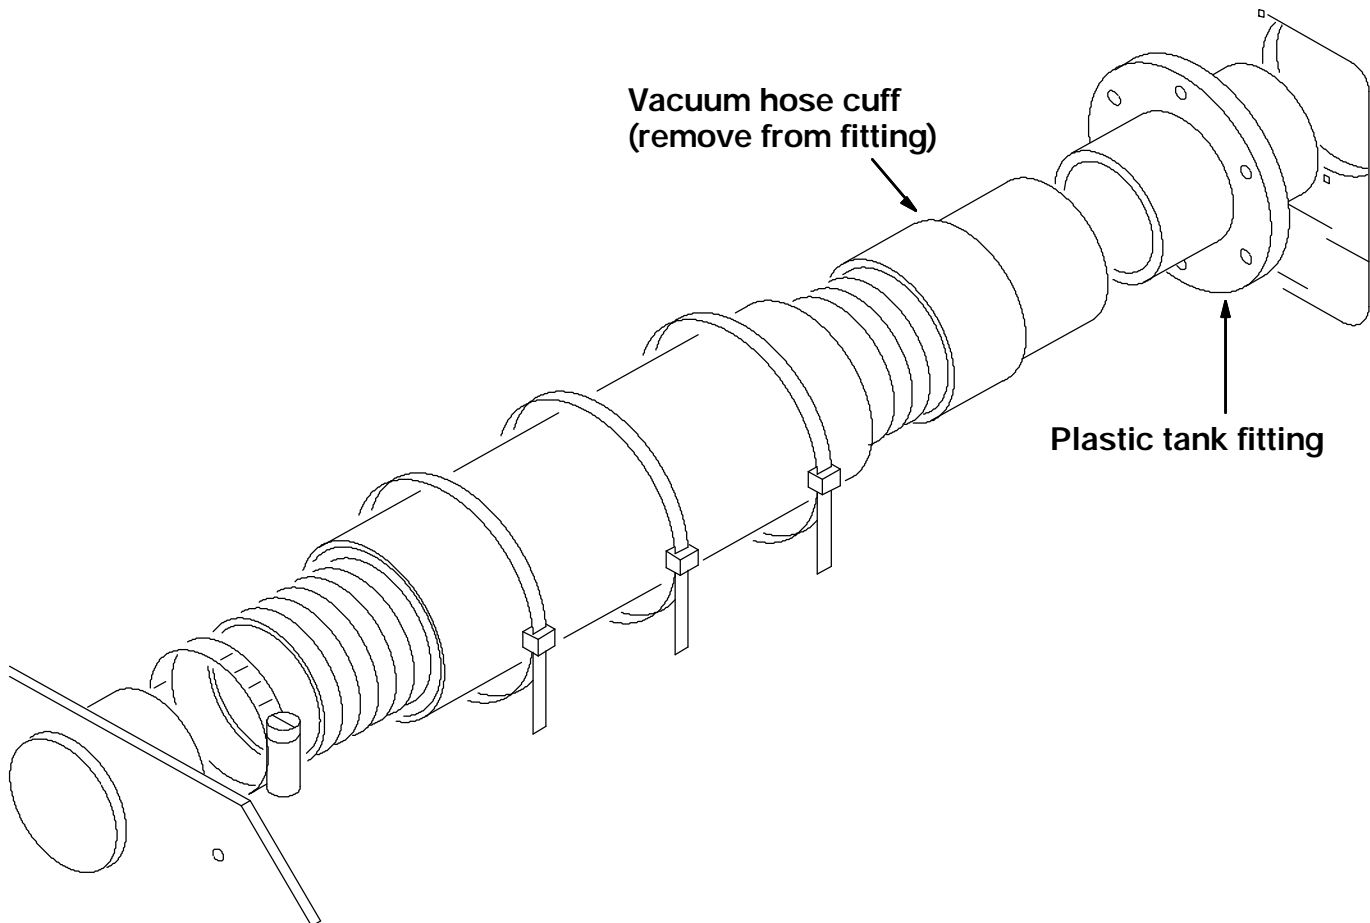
Remove Vacuum Hose Cuff From Plastic Tank Fitting
